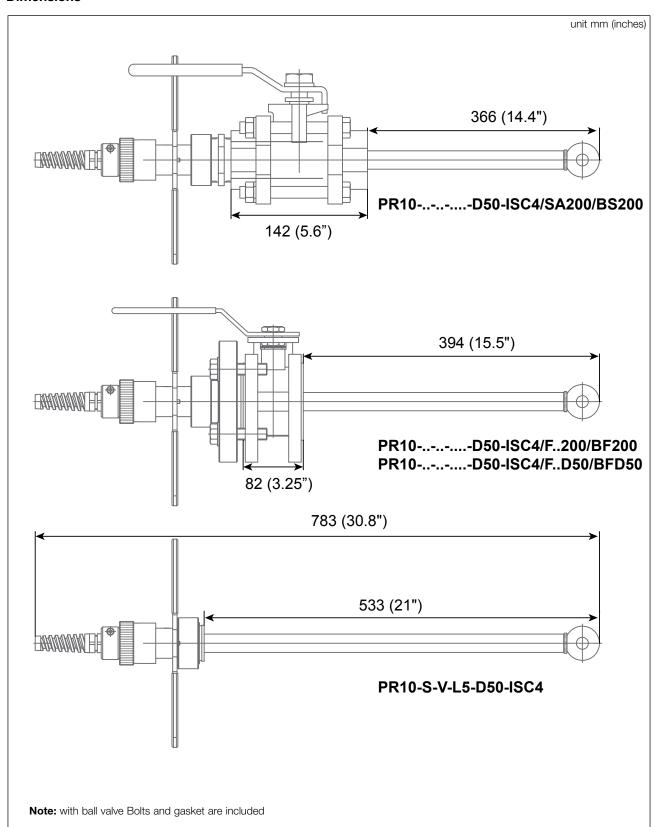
Dimensional drawing PR10...-D50 with mounted ISC40 sensor
